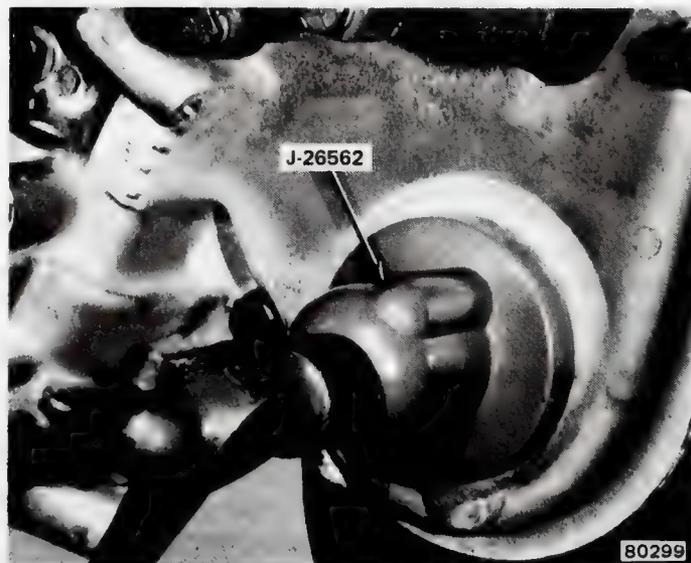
B-143 Installing Timing Case Cover Oil Seal
